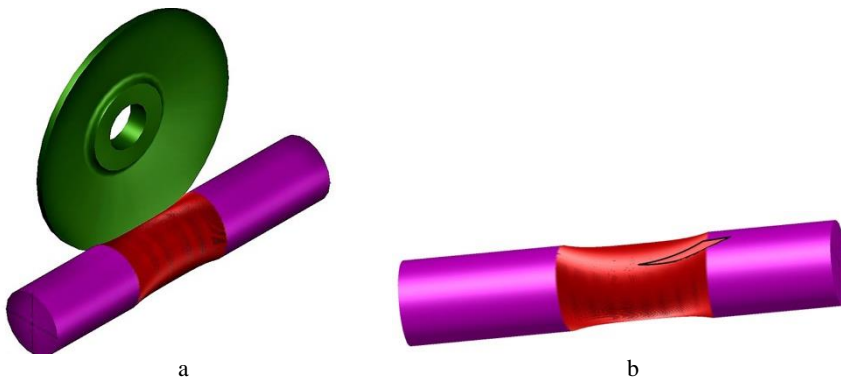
Actual contact patch of the dished wheel (a) with the cylinder simulating involute profile on the tooth head, taking into account the displacement of the tool from the previously machined area in the direction of the feed rate by the value of the running-in path (b).
